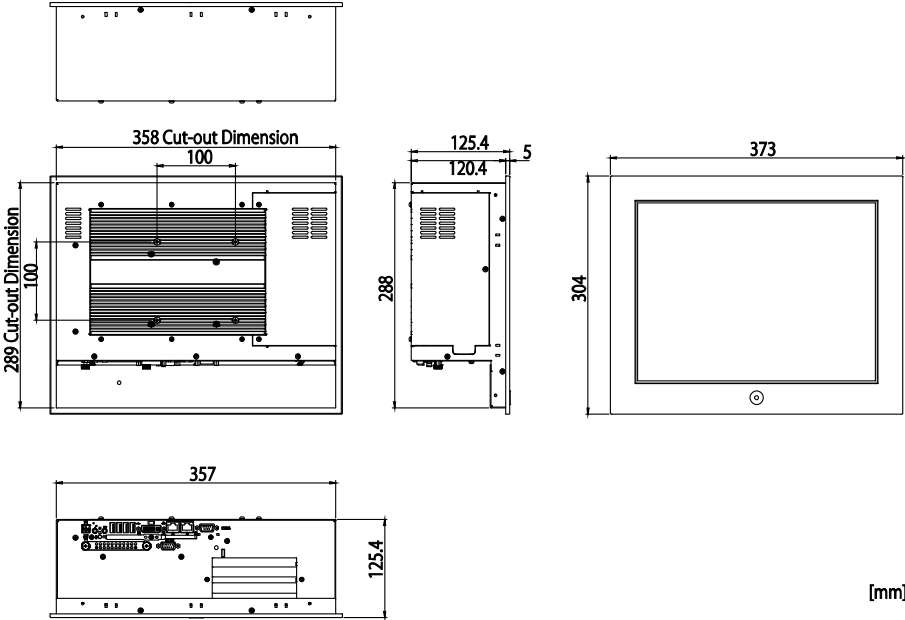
Physical Dimensions (PT-S959HXP2-DCxxxx)
